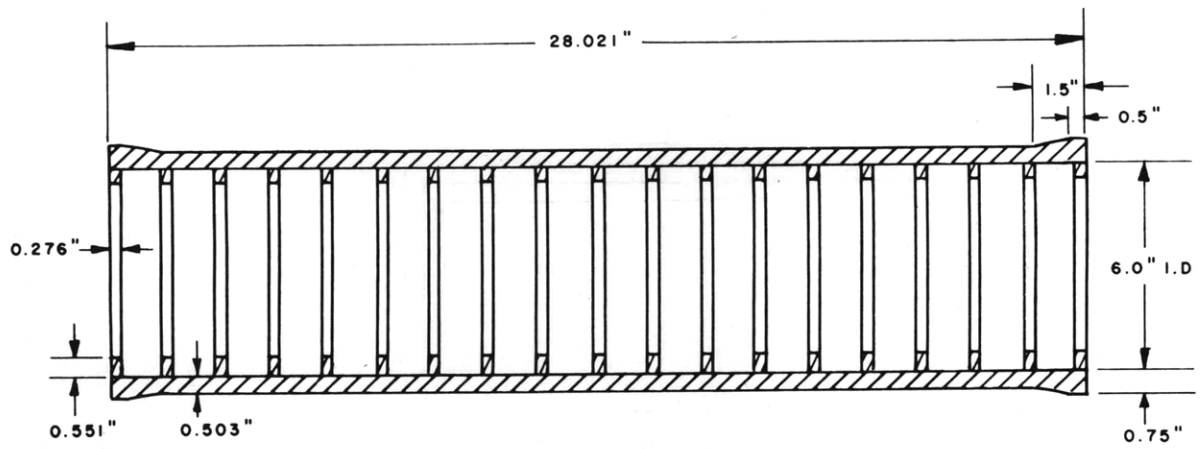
Details of Glass-Reinforced-Plastic Test Model, RV-8
